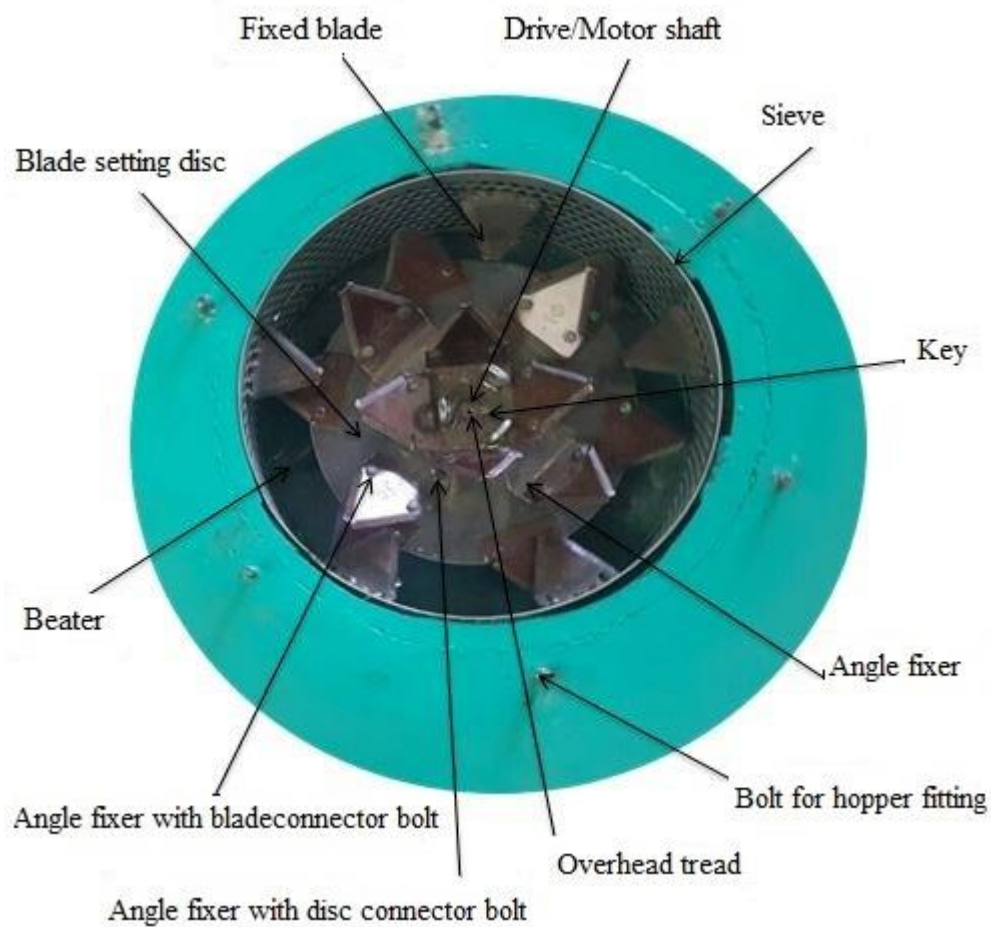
Fixed and rotating blade arrangement inside the housing
